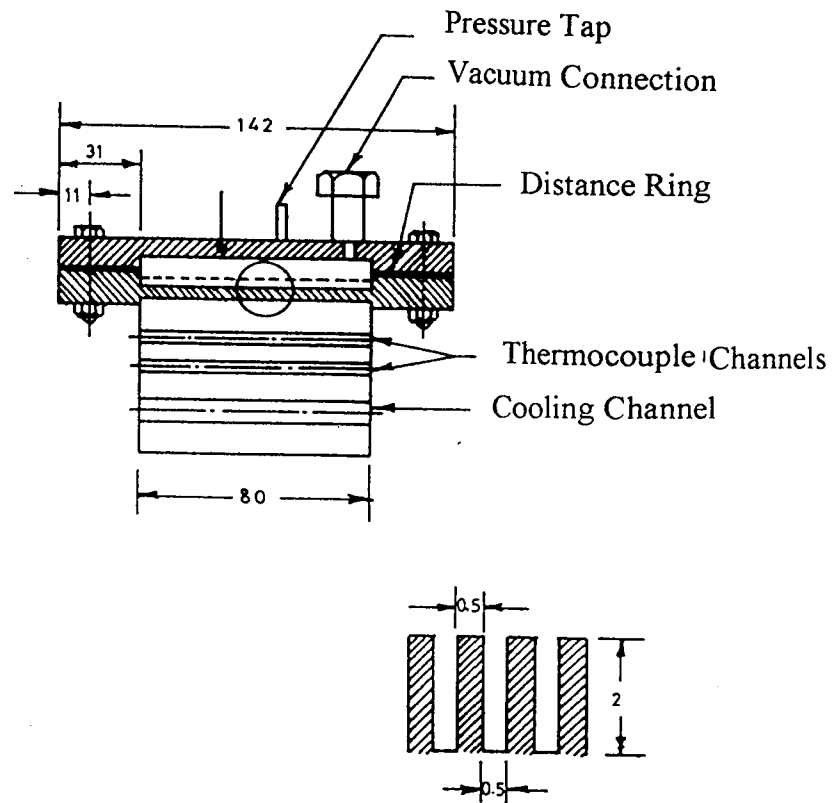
Stainless Steel Flat Heat Pipe - Transverse Section
